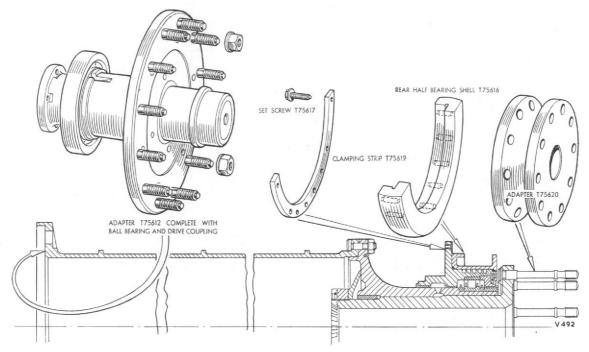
Preparing centre shaft assembly for balancing in Avery type 7208 machine.
